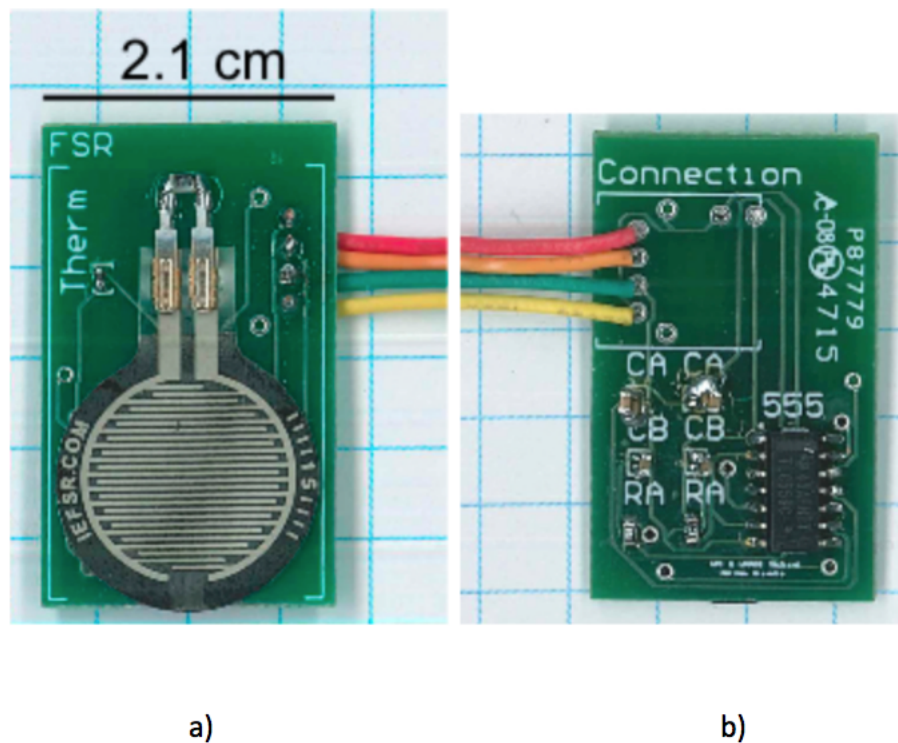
Electrical Prototype Assembled where a) is the Front and b) is the back
